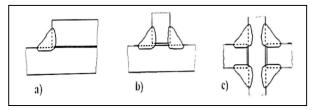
Fillet welds in different joints a) Lap joint b) T-joint c) Cross joint
